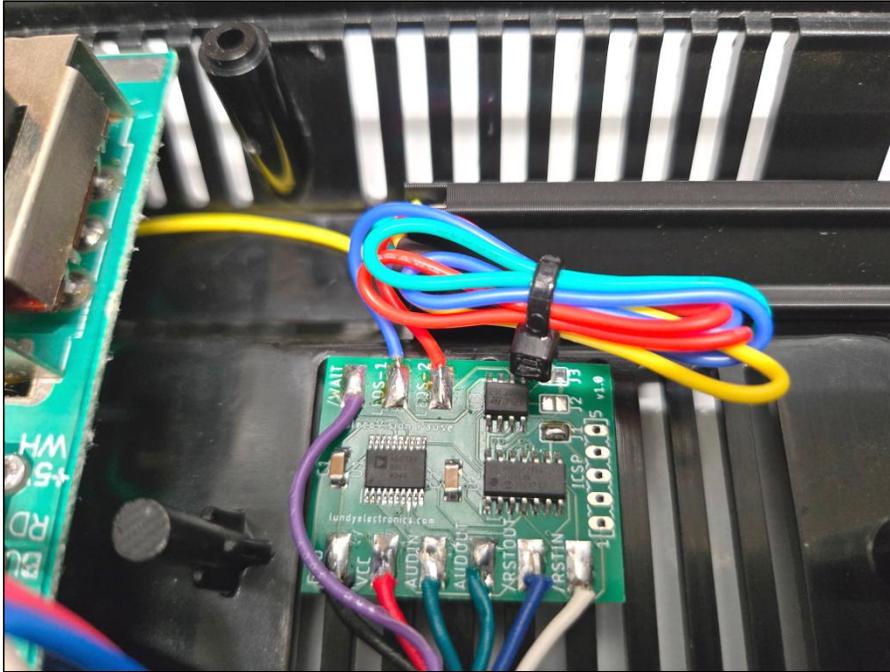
Placement of Pause Mod PCB with dual LED assembly bar
